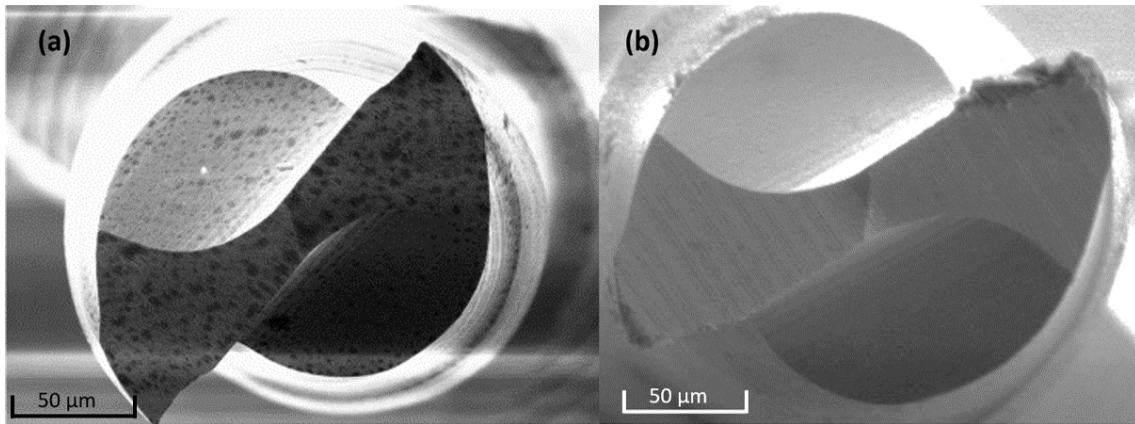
SEM image of tool 1 (a) before (b) after machining.
